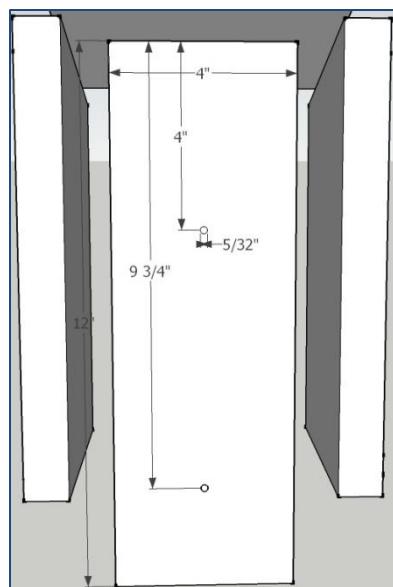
Nest box rear panel 5/32" mounting screw drill holes
